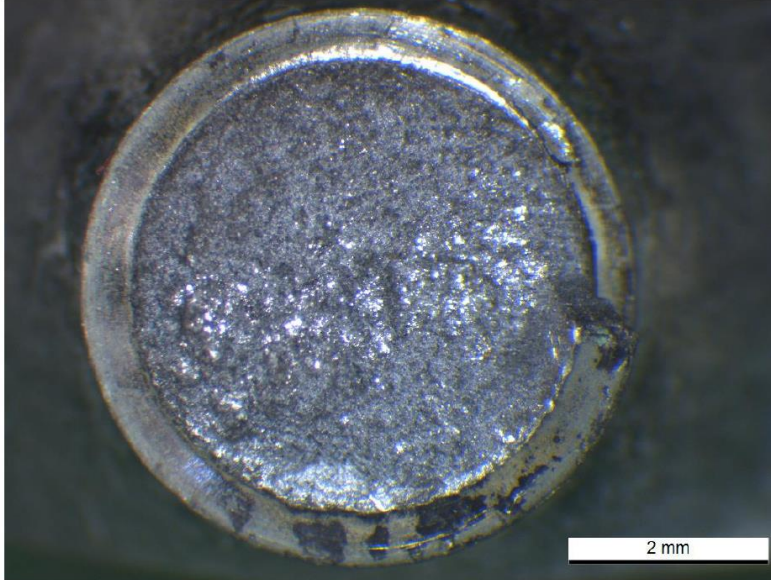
Forward left hand steering rod fracture surface in cleaned condition.
